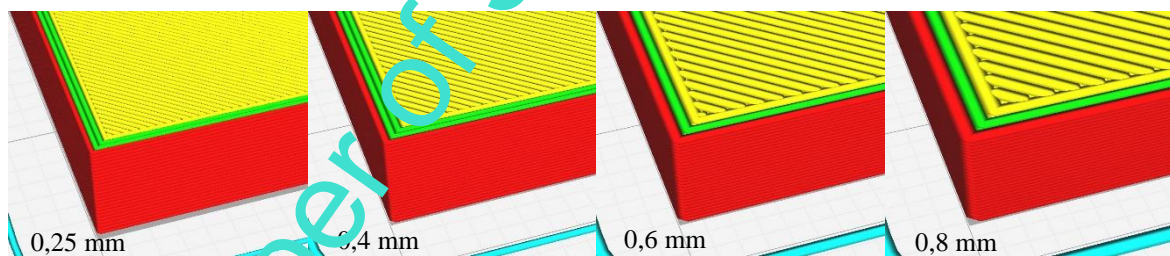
Example of 3D printing product with different printhead nozzle diameter
